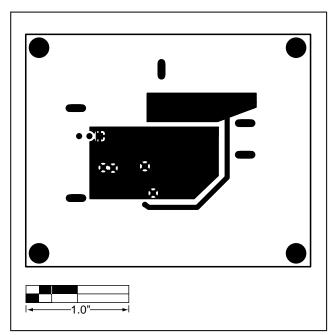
MAX618 EV Kit PC Board Layout—Solder Side
